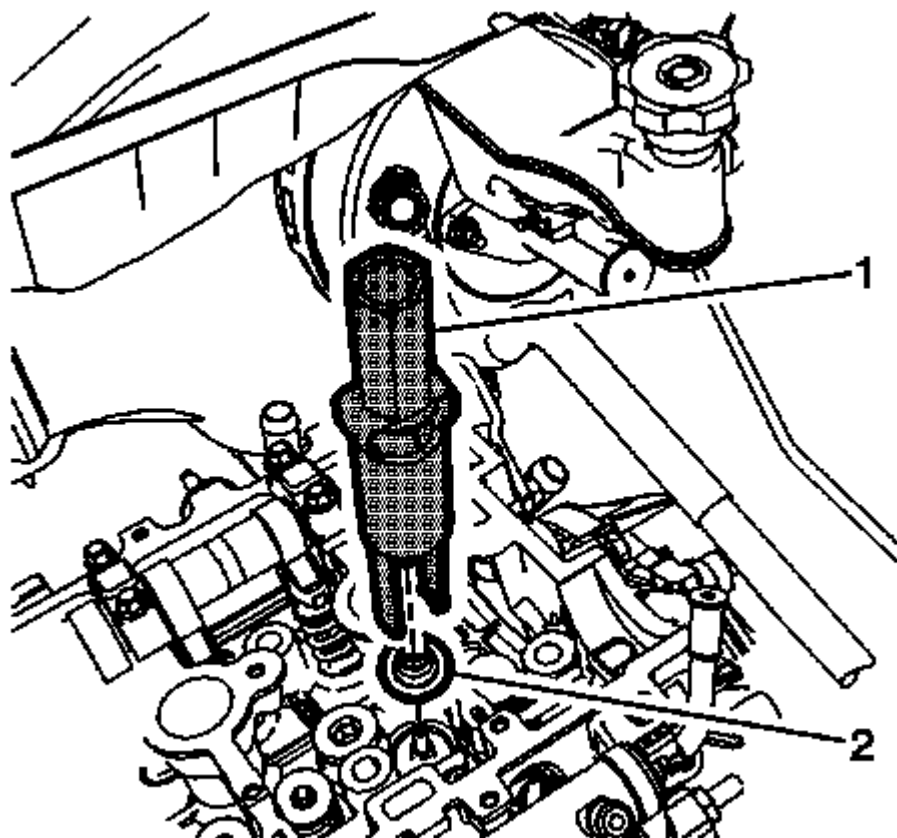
View Of Valve Guide Seal Remover/Installer
